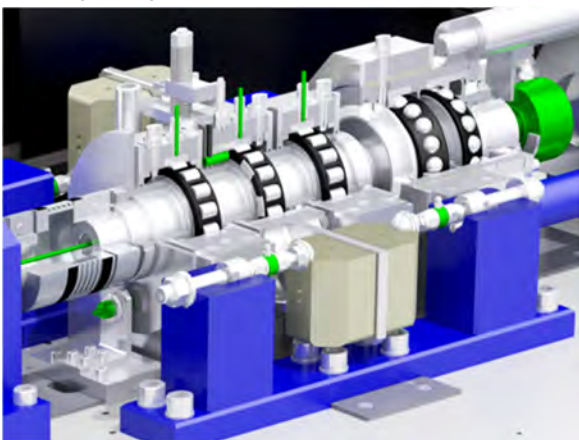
Cross section of the test bearing unit of the Oscillation Test Rig.
